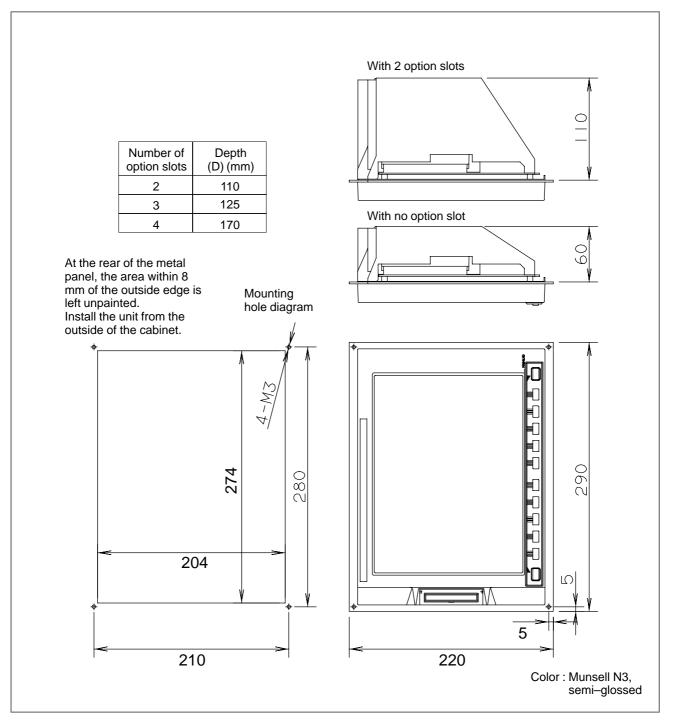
External dimensions of 9.5" LCD–mounted type CNC control unit
